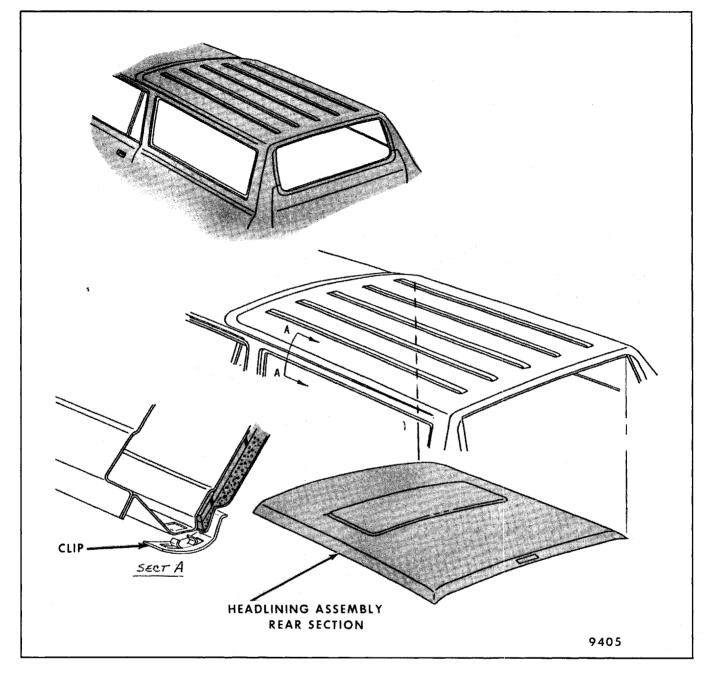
Headlining Rear Section Assembly - B-35 Style (A-35 Similar)
